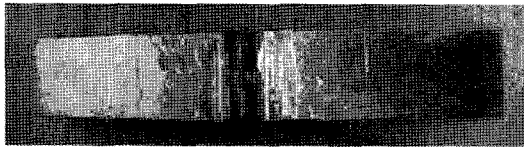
Peel-tension specimen with pull-out failure mode after fatigue test.
